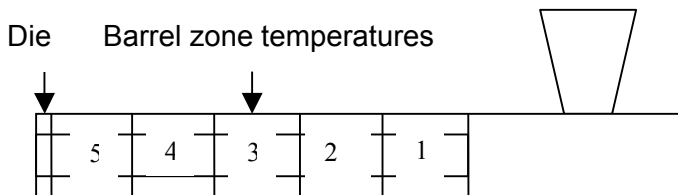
Cross-sectional view of the extruder with five separate heating zones.
